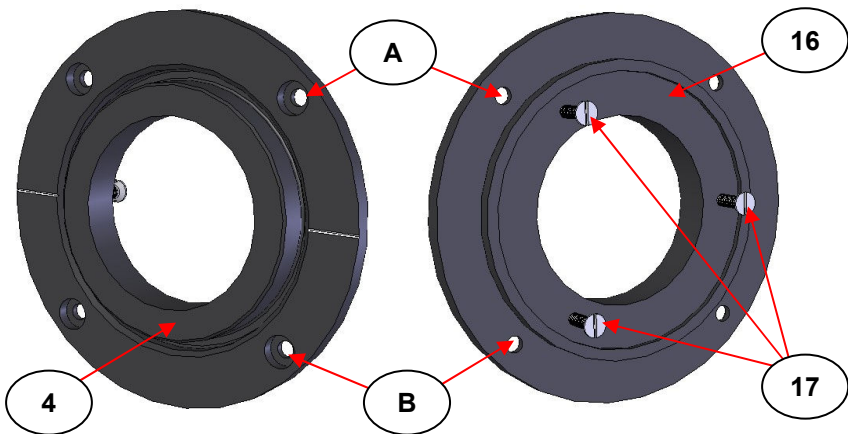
Front and Rear Views of Circular Plate That Holds the GS57010 Series Polarizer
